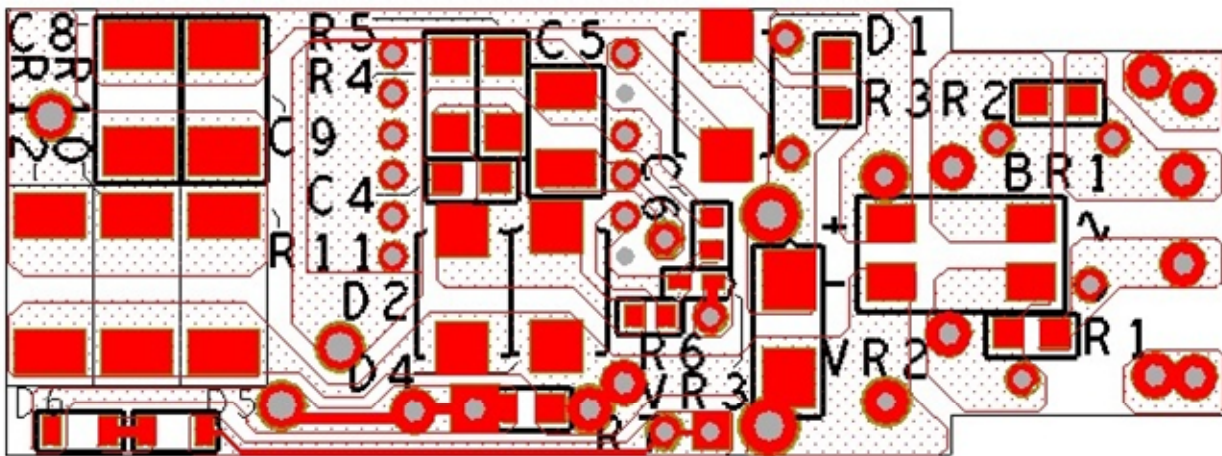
Bottom Side. Dimension 53.5 mm x 19.6 mm.
